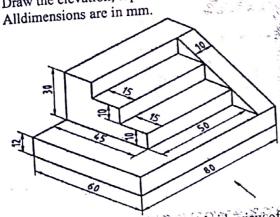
B) Draw the elevation, top view and side view of the object shown in figure 2. All 12 Apply dimensions are in mm.
